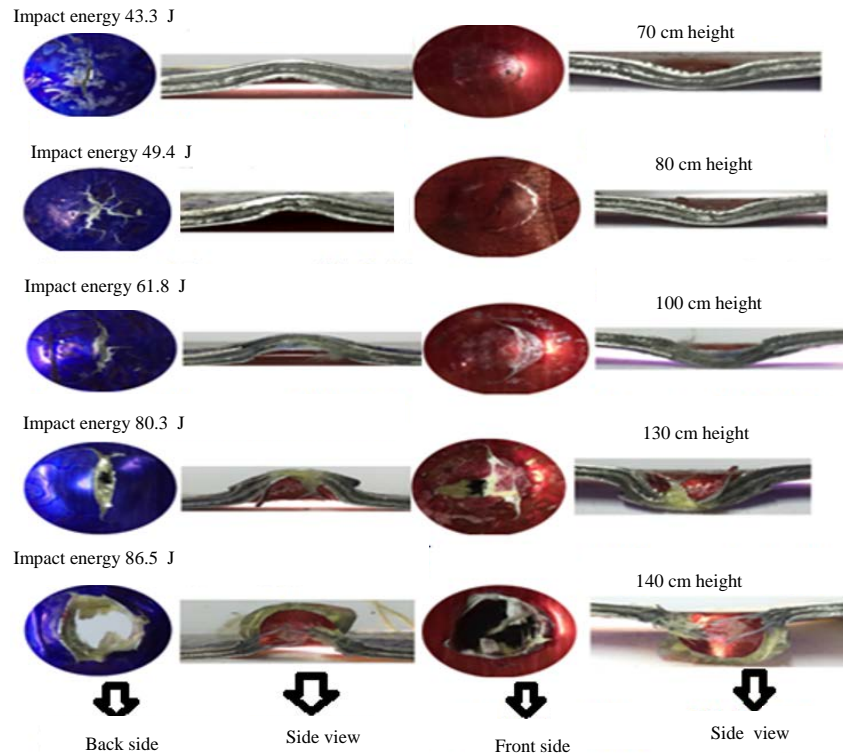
FML-2, magnified scale of fracture surface due to drop weight impact test
